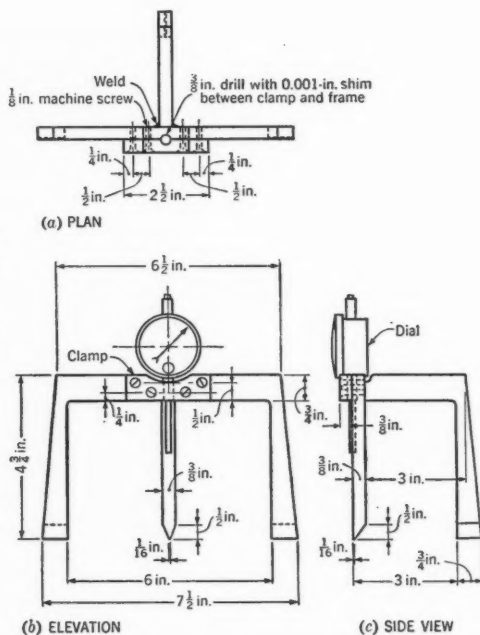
VIEW OF STEEL TRIPOD FOR DETERMINING EXPANSION
